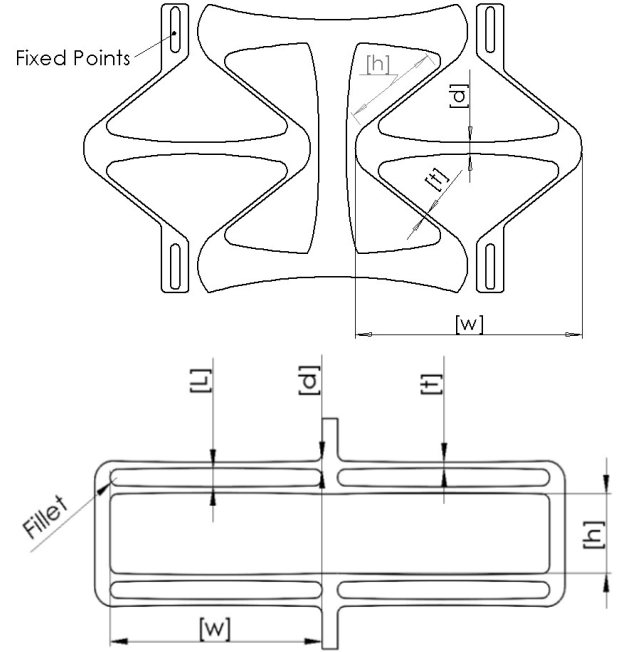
Shape and key dimensions of the X-Bob (top) and LET (bottom) single unit.
